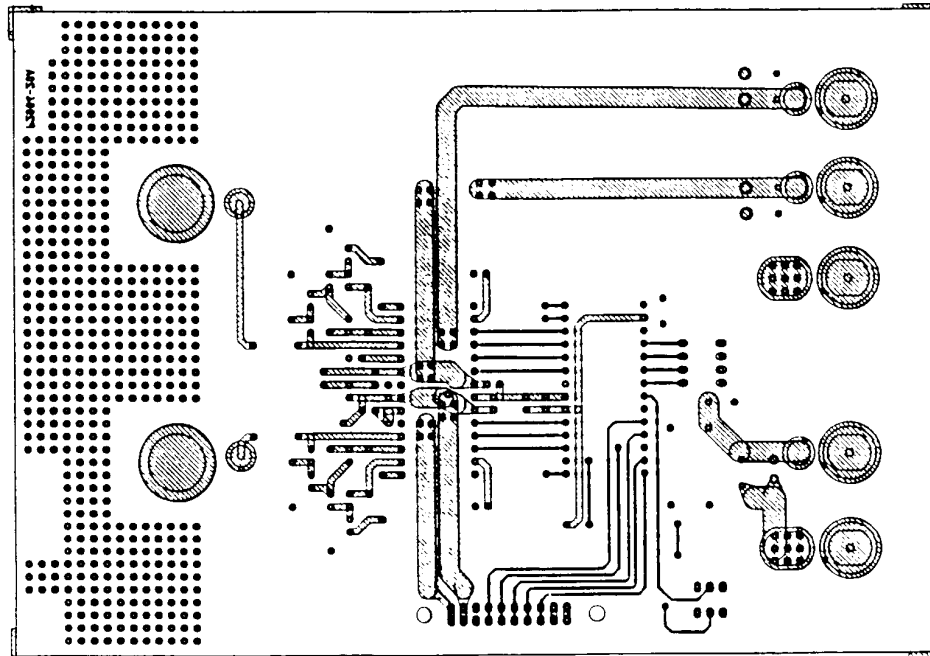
DEM-PCM1760 Board Layout—Component Layout.
